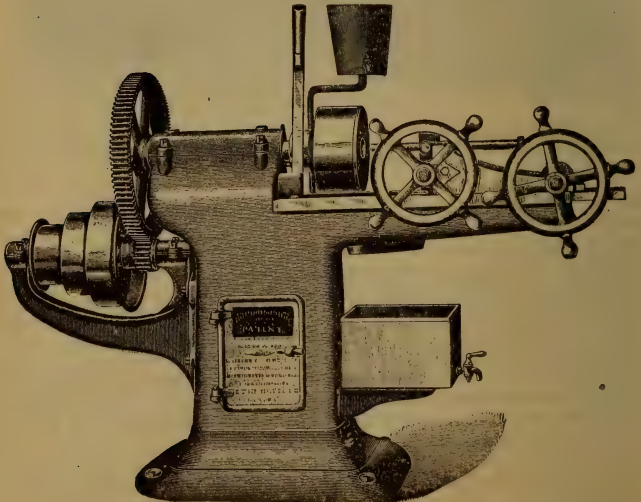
Merriman Standard Bolt Cutter. Size No. 2.
